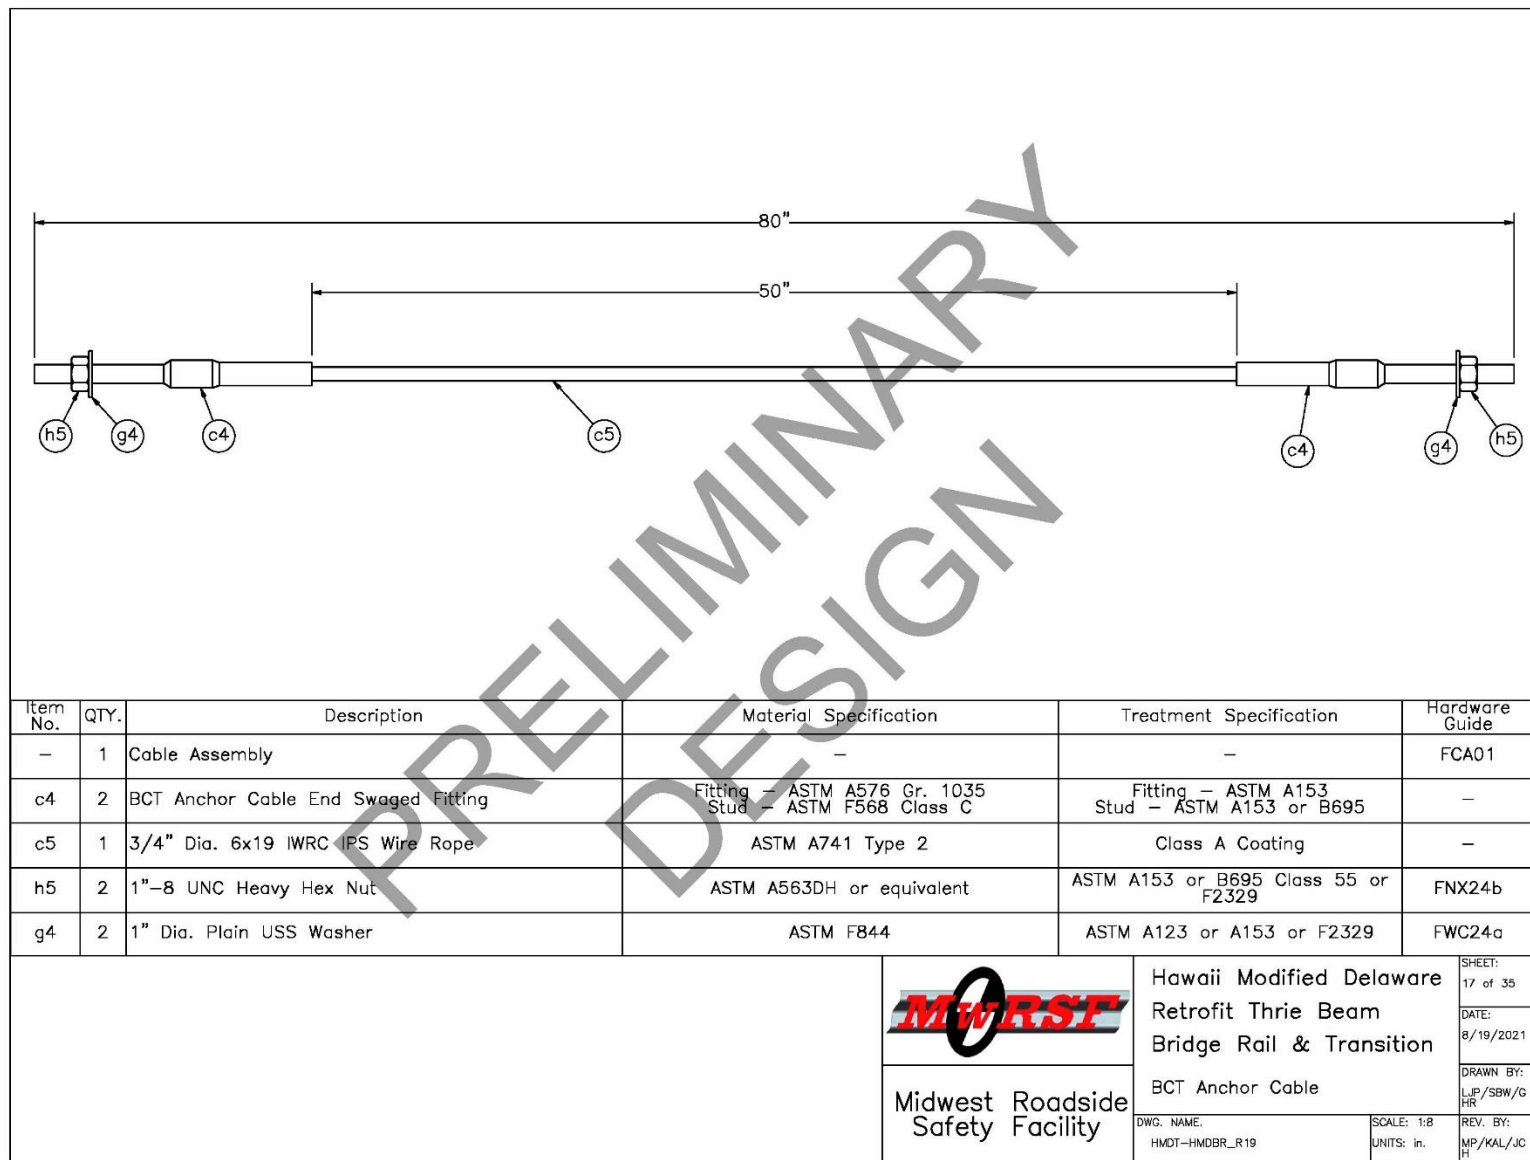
BCT Anchor Cable, Test No. HMDT-1
